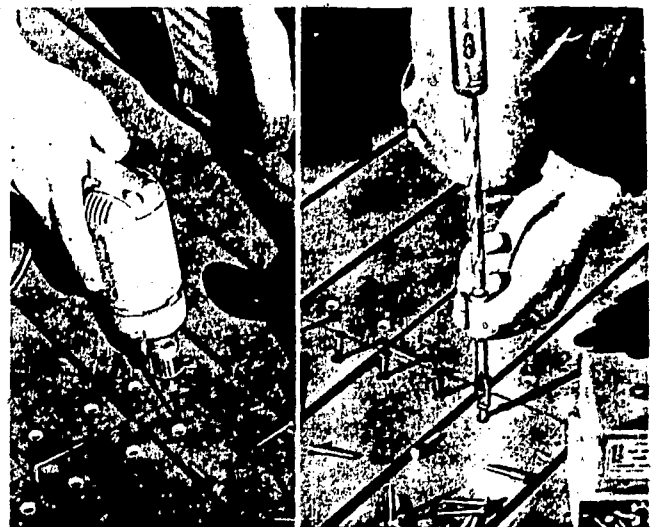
Left. Drilling countersunk holes with special bit.
